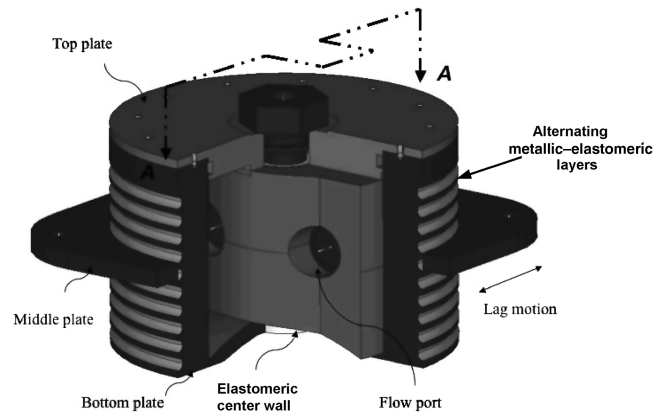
Partially sectioned isometric view of Fluidlastic lag damper.
